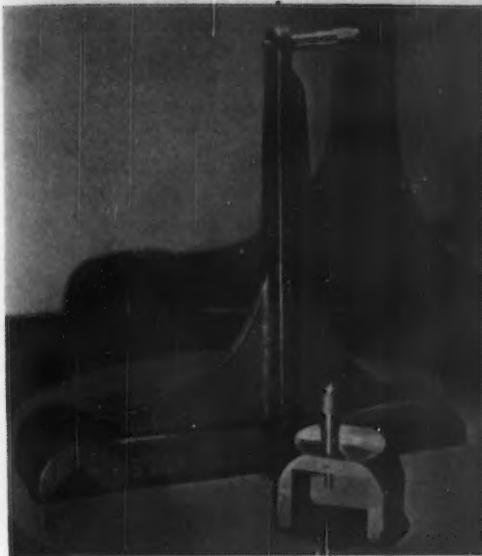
Monarch micro-gaging method of tool setting employs a small gage for outside tool setting. The larger gage is for setting the boring bar.
